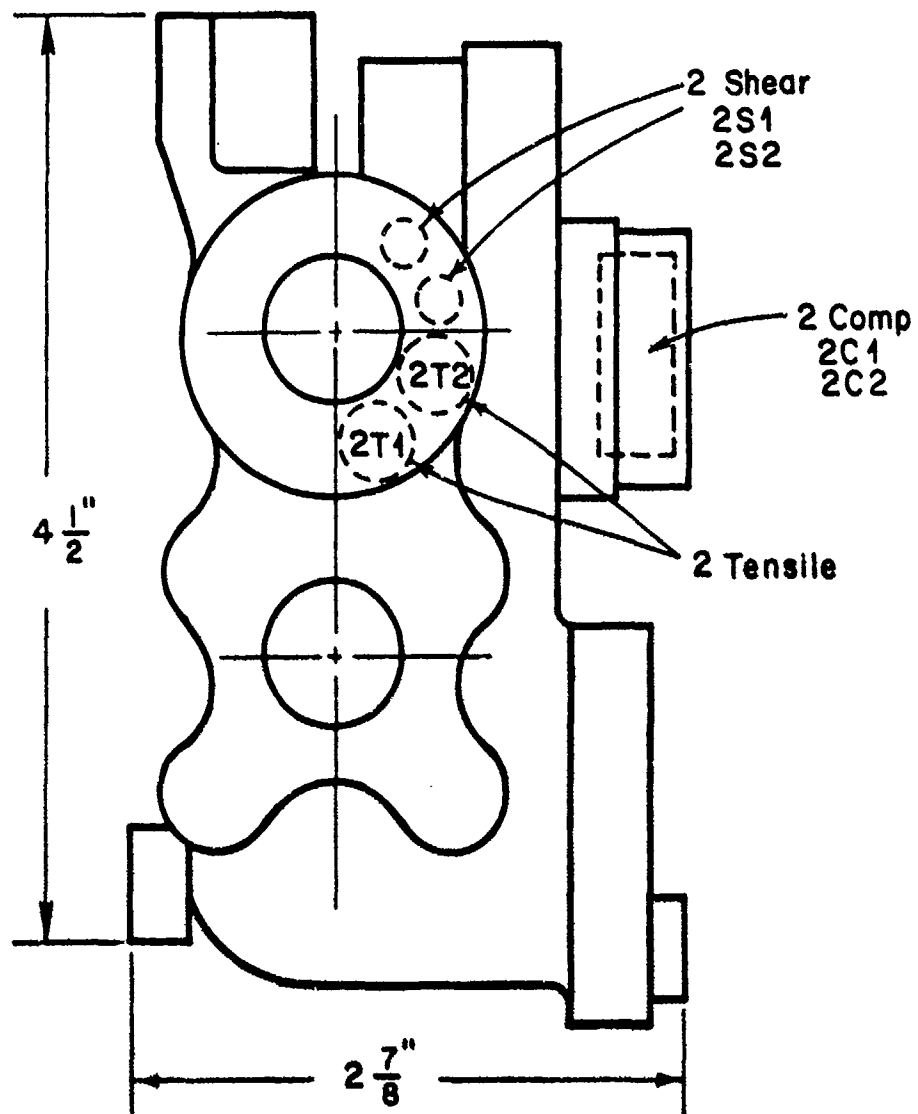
Location of test specimens for 15-5PH (H935) shaft casting.
